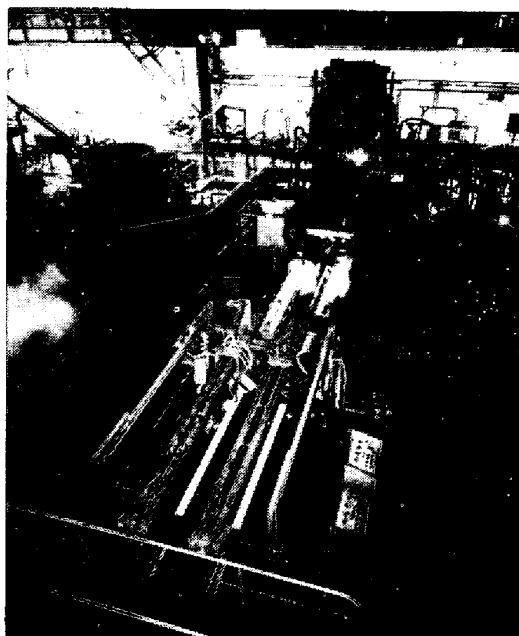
Horizontal continuous casting machine of NKK¹³⁾.
